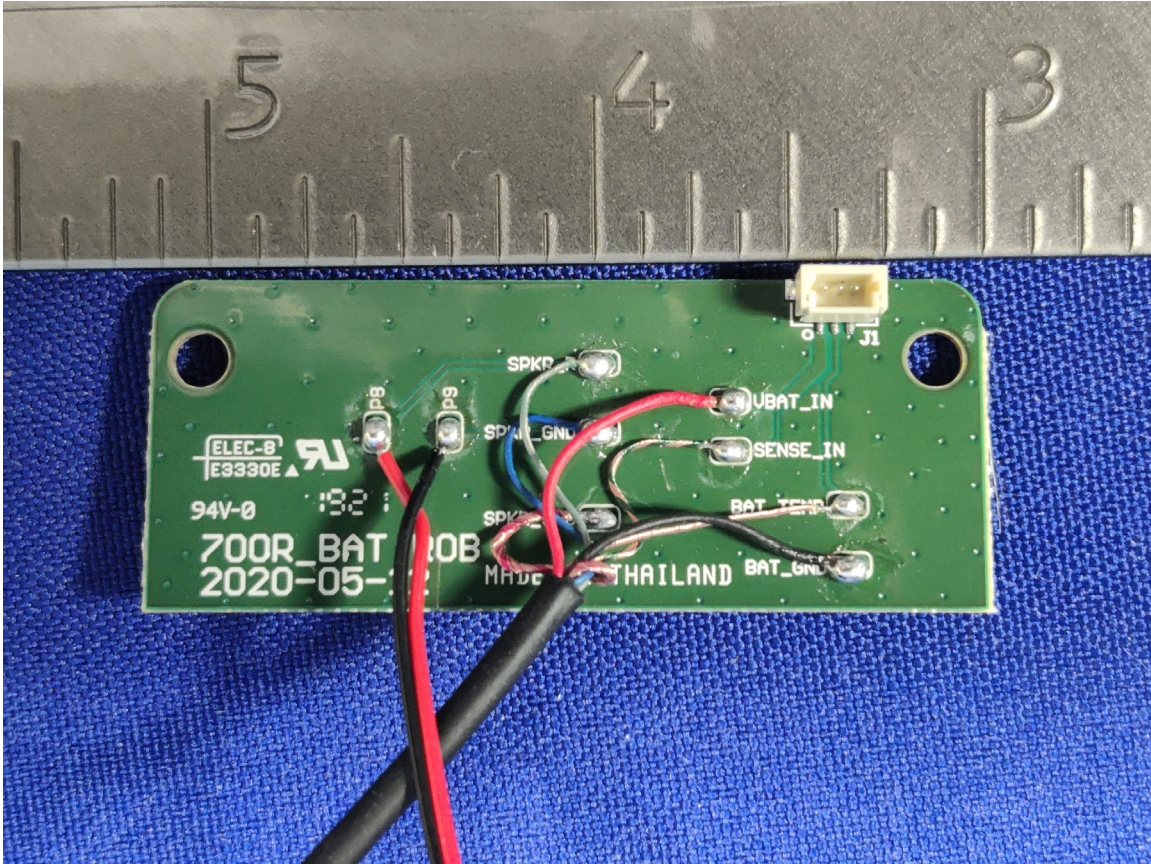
Internal Photo of Stealth700P-MAX-RX – Top PCB (Right Ear)
